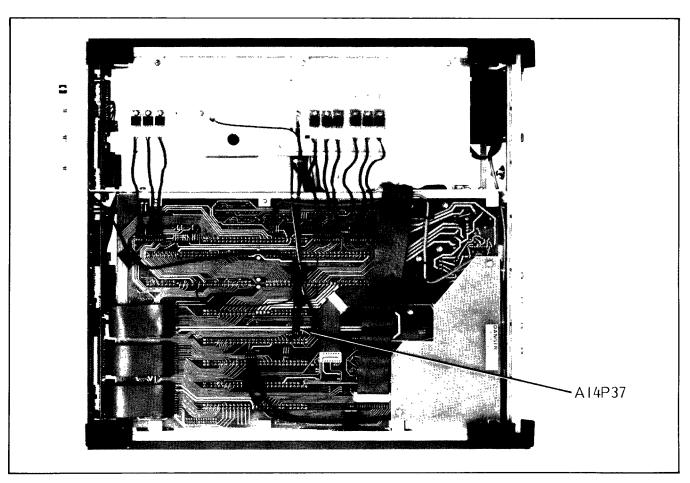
6600 Series Programmable Sweep Generator, Bottom View
